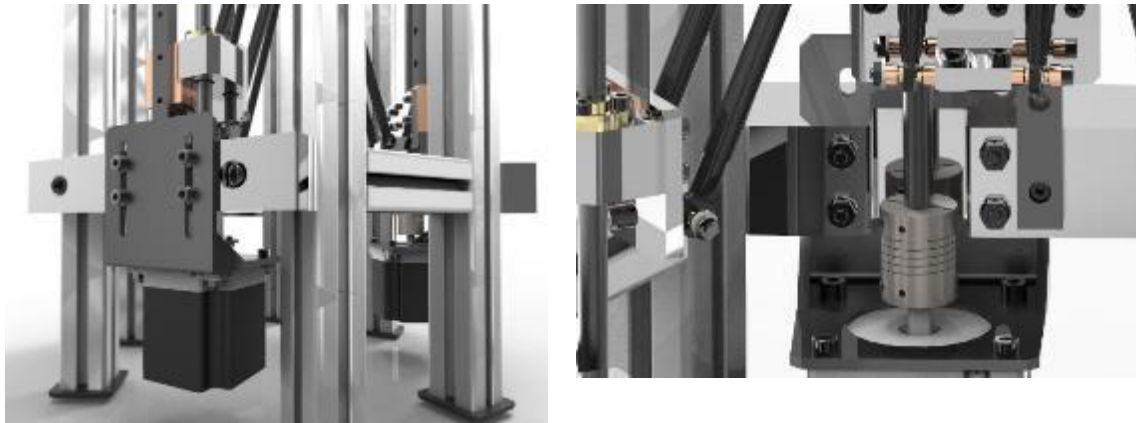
The assembly of the motors marks as n. 4 in the 3D stage assembly
